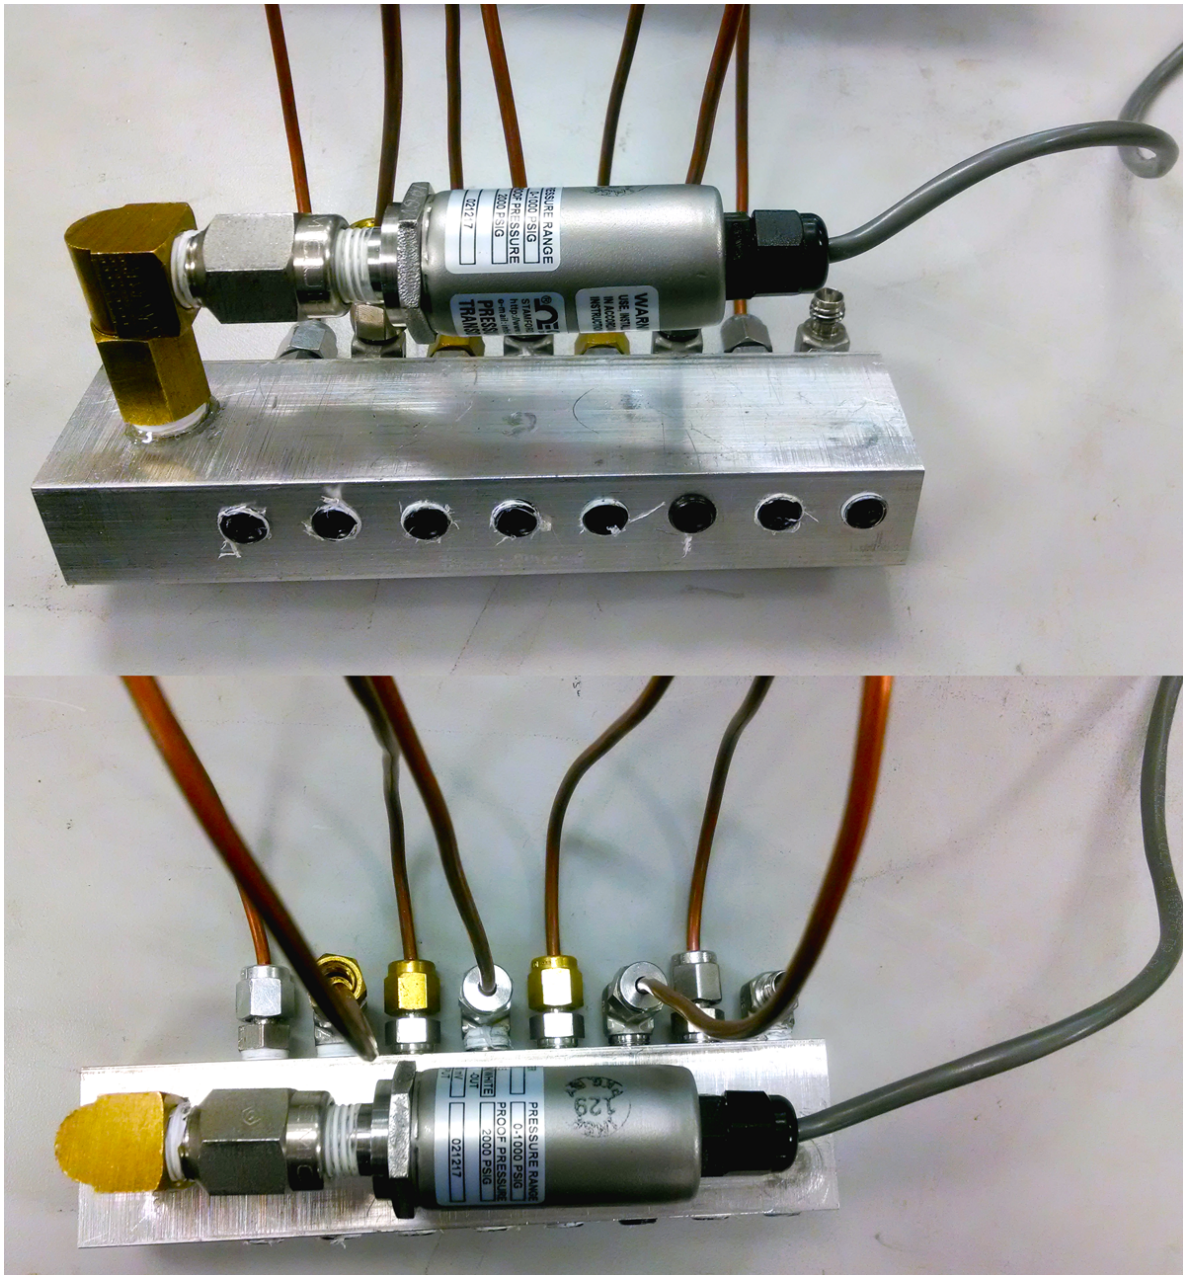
The finished product with sensor, screws, balls, and fittings assembled.
